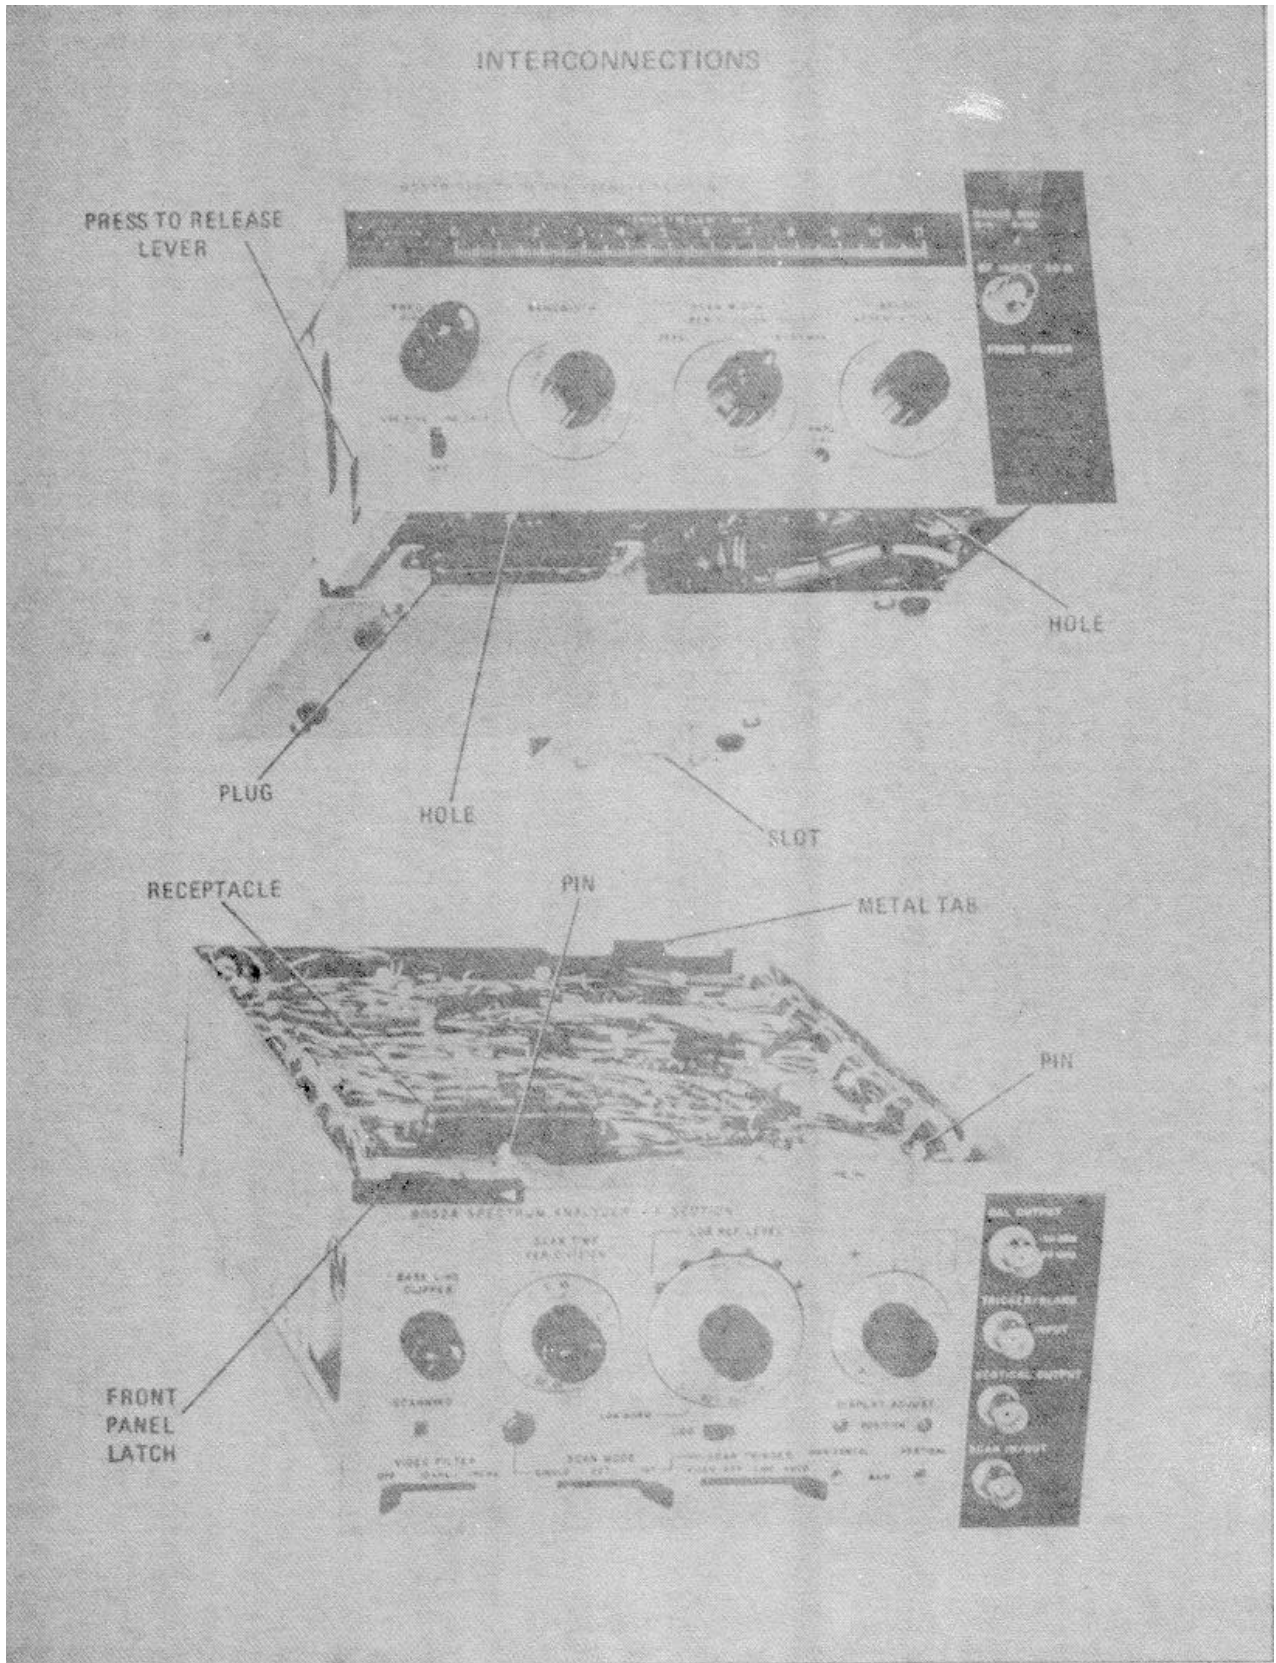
RF Section and IF Section Interconnections 2-3/2-4
